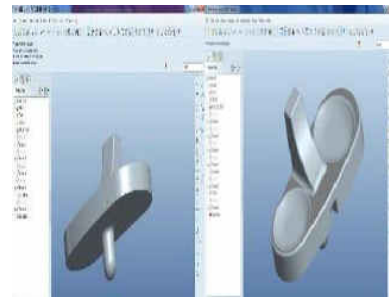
Existing mobile bearing 3D models by PRO-E. 5.2 Modelling of the modifying mobile bearing The modifying mobile bearing size is shown in fig.28.
